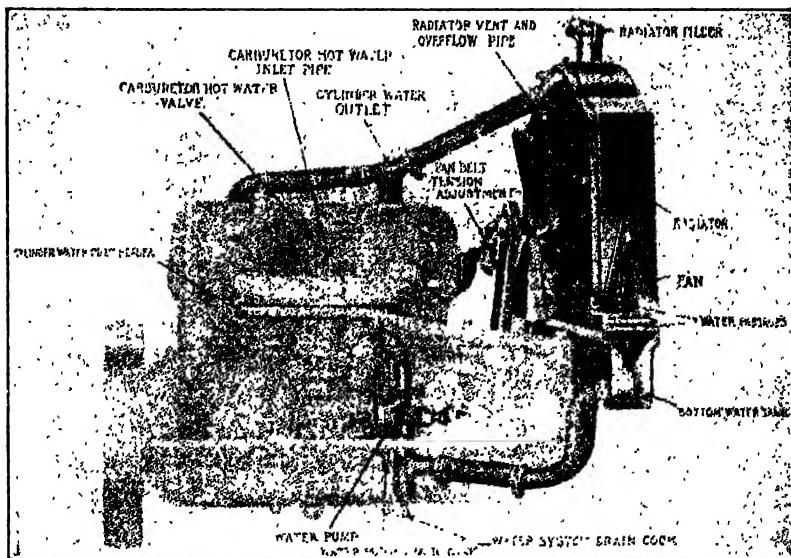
The Packard Cooling System, Showing All Important Components.
